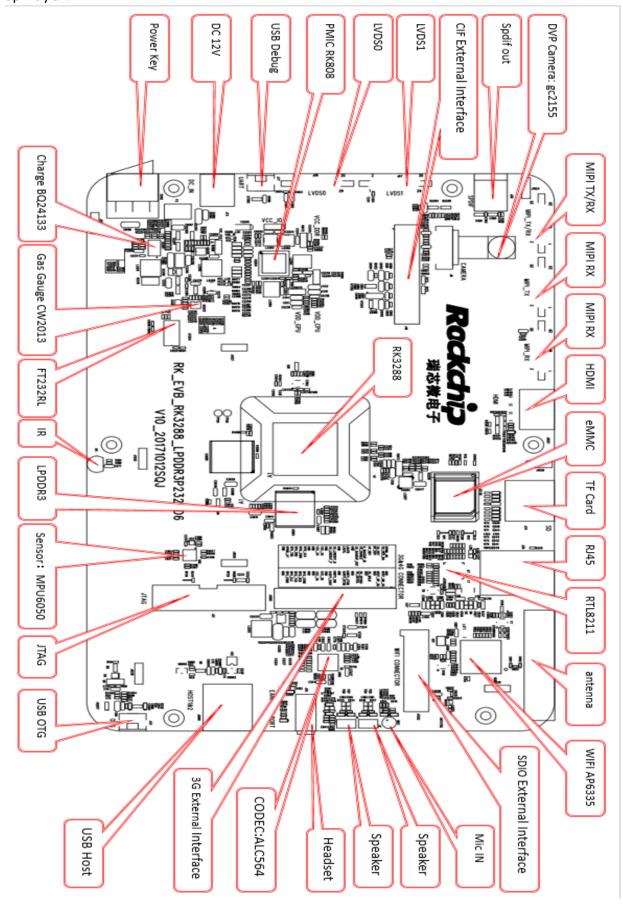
RK3288 EVB 2.0 PCB top layer
